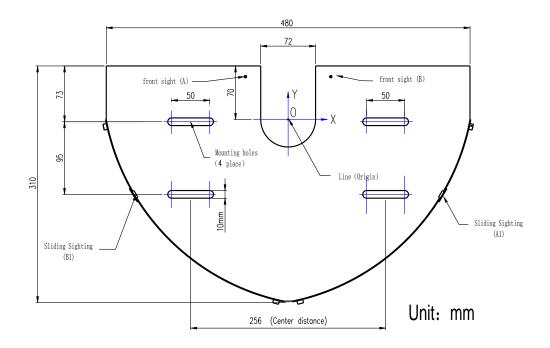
Plane Dimensions Drawing of BGK-1850 Pendulum WireCollimation Device
